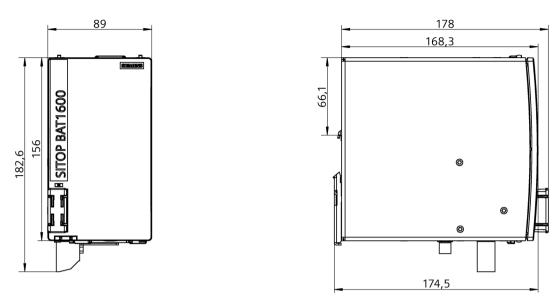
Dimension drawing 6EP4133-0GA00-0AY0 (3.2 Ah)
